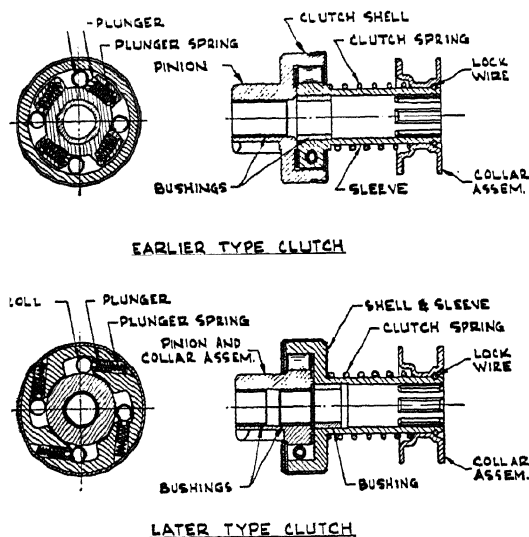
Two DESIGNS OF THE OVERRUNNING CLUTCH
